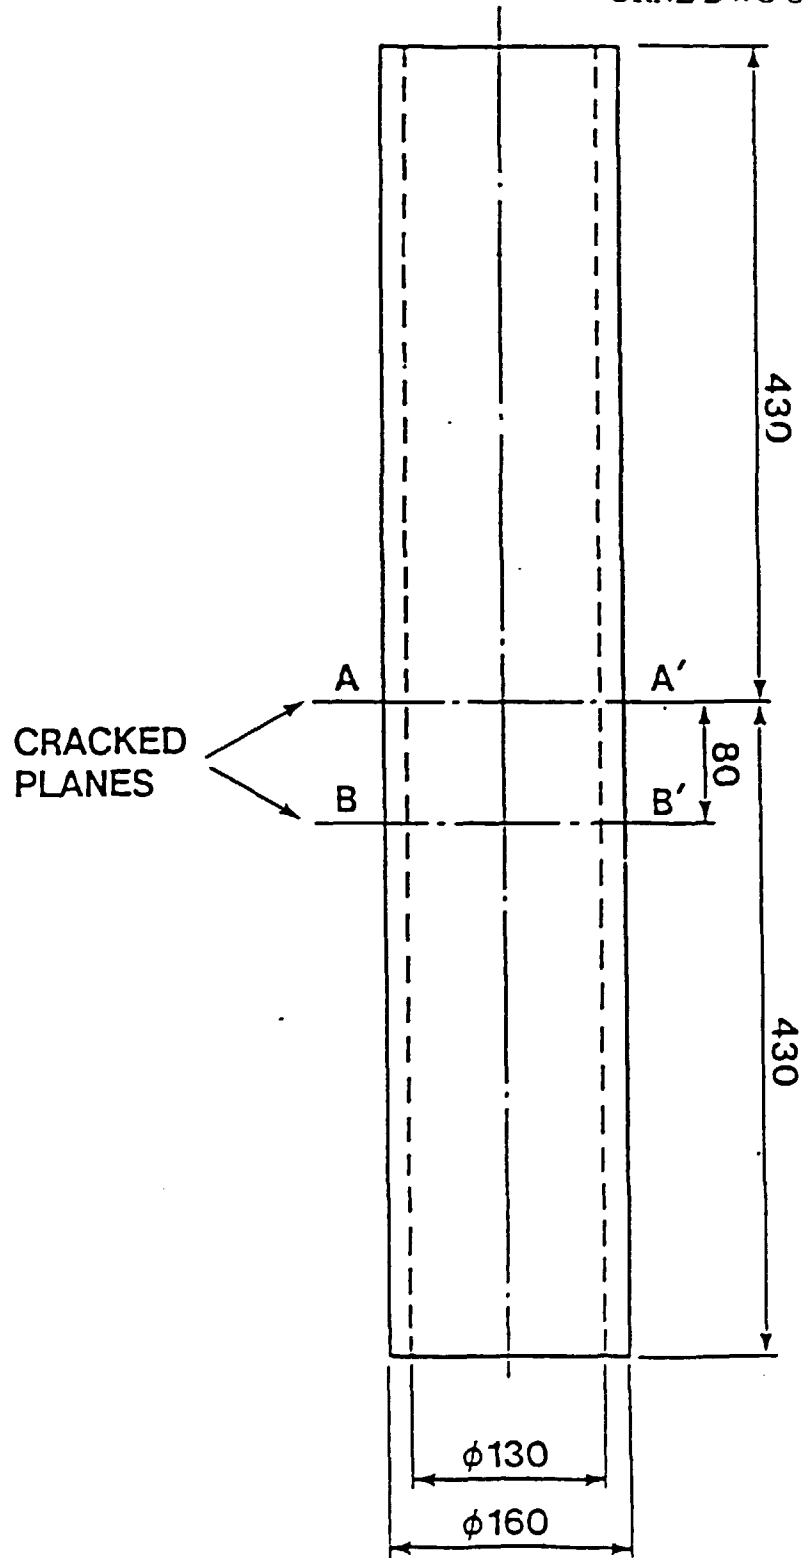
Position of flaws in cylindrical specimens (unit: 1mm).
